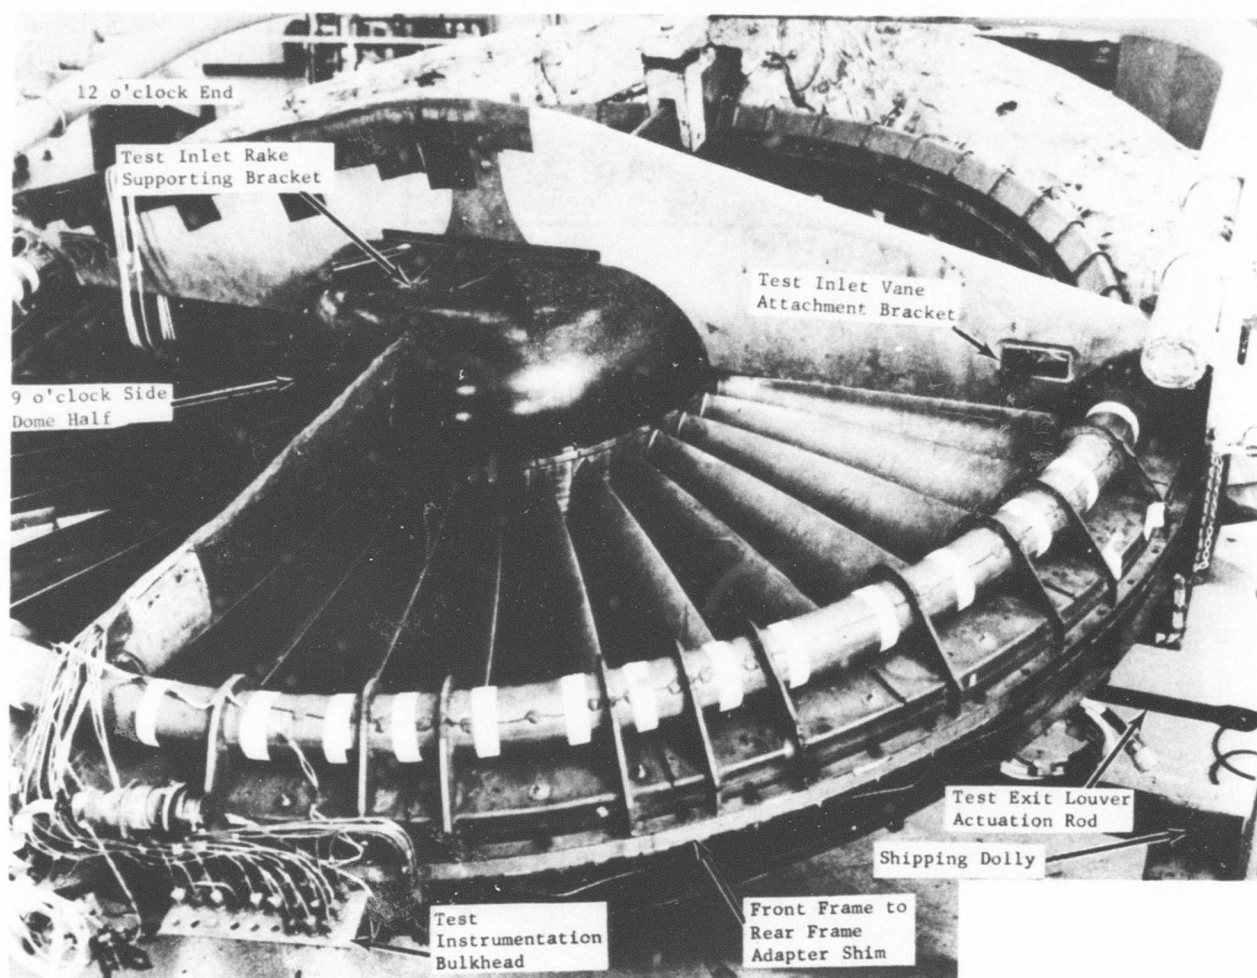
LF-2 Fan Assembly Removal from Test Facility Upon Termination of the 100-Percent Speed Checkout. The Epoxy Glass-Cloth Dome is Shown. A Front Frame to Rear Frame Adapter Spacer is Removed for Visual Inspection of Turbine Bucket Shrouds.
